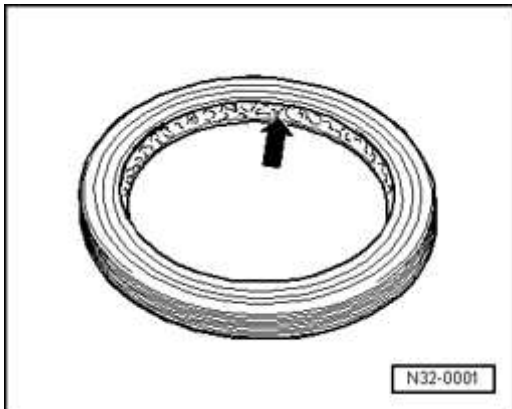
Identifying Space Between Oil Seal Sealing Lips
